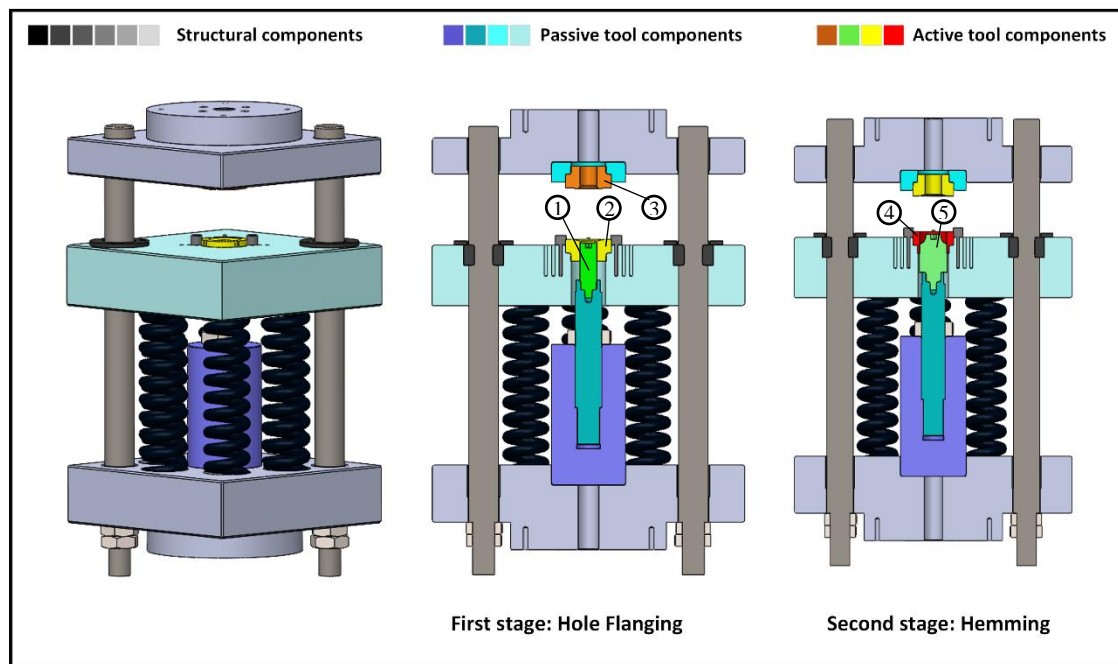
Illustration of the hole hemming tool: 1 - Flanging punch, 2 - Bottom die, 3 - Upper die, 4 - Blank holder, 5 - Hemming punch.
